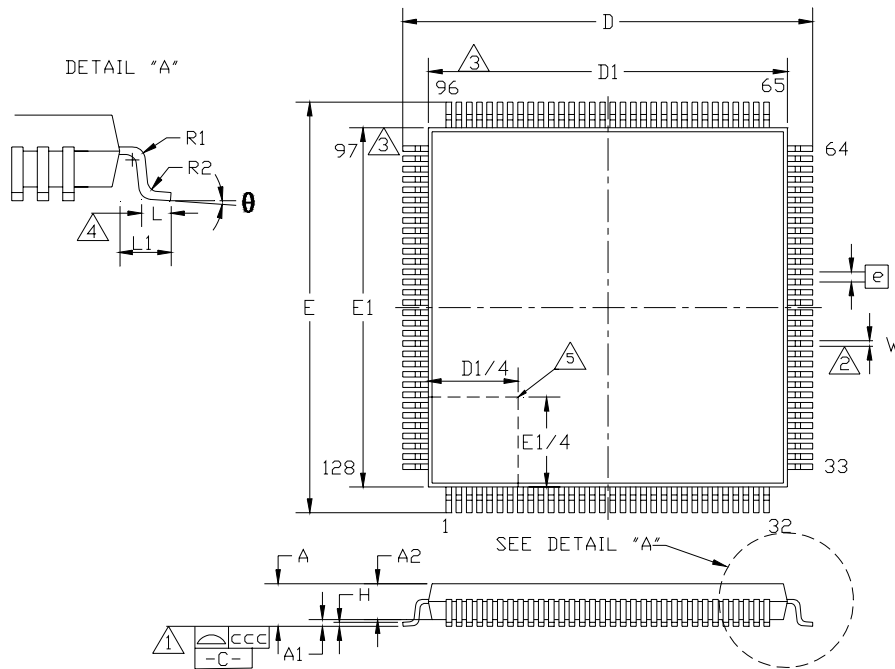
USB2226 128-Pin VTQFP Package Outline
